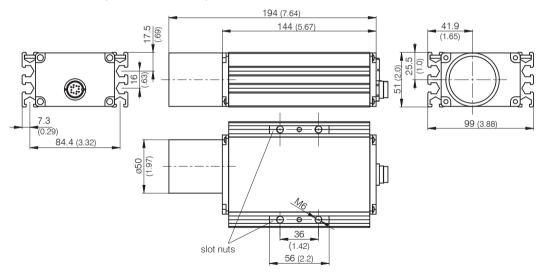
Dimensional drawing sensor, dimensions in mm, not to scale
